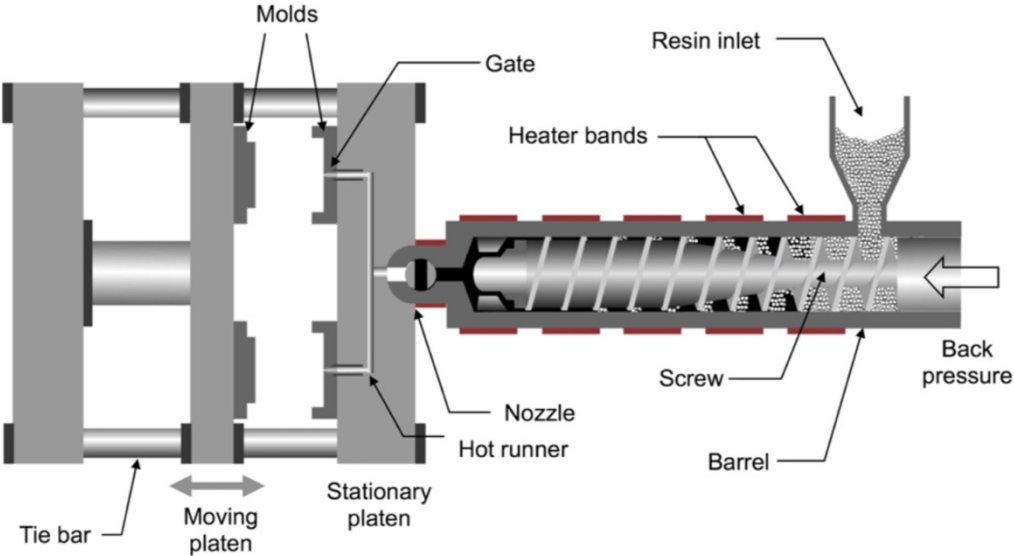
Major components of an injection molding machine showing the extruder (reciprocal screw) and clamp units [13].
